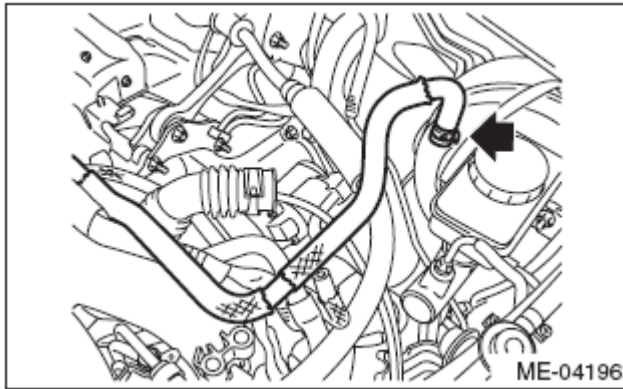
Locating Brake Booster Vacuum Hose And Clamp
